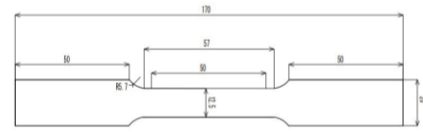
Shape and dimensions of tensile test specimens in mm, standard ASTM E8M-09, type 12.5 mm.
